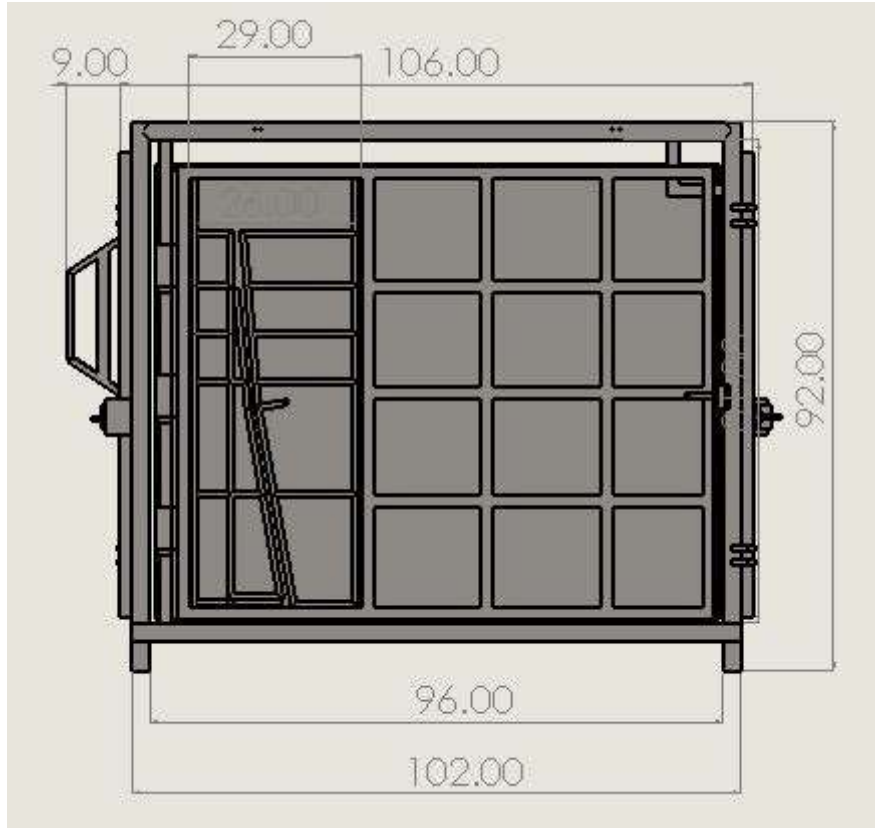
Image of side view of assembled chute model with dimensions (in inches)
